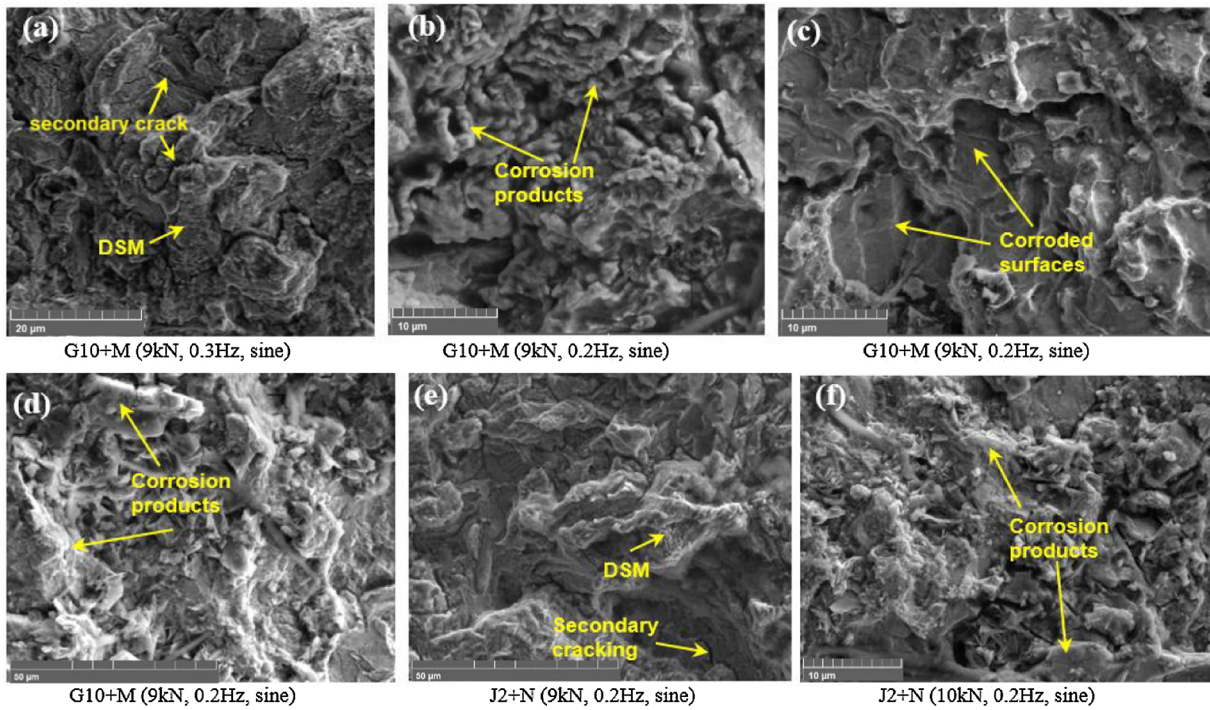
Fractographs of fracture surfaces of corrosion-fatigue testes specimens (a-d) for S355G10 + M, (e & f) for S355J2 + N.
